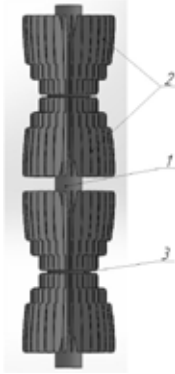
General view of the ribbed tube: 1 – tube, 2 – rib sections, 3 – fixing ring
